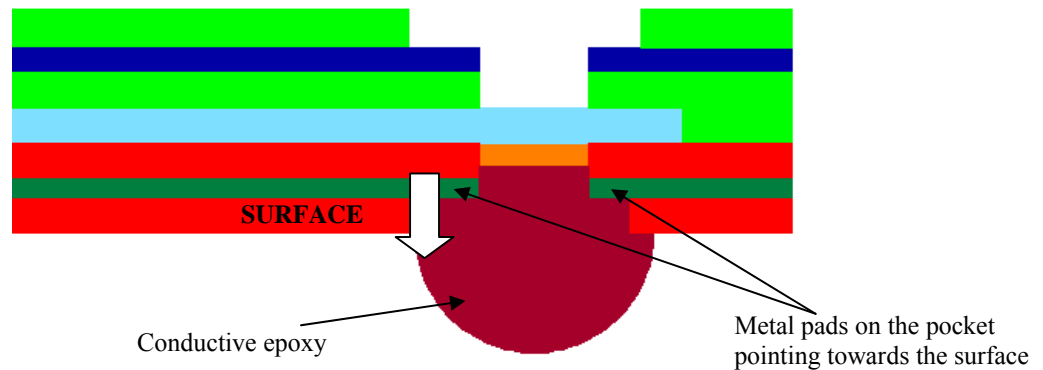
Ideal metal bonding pad orientation; the metal pads on the bottom layer point toward the bottom surface.
